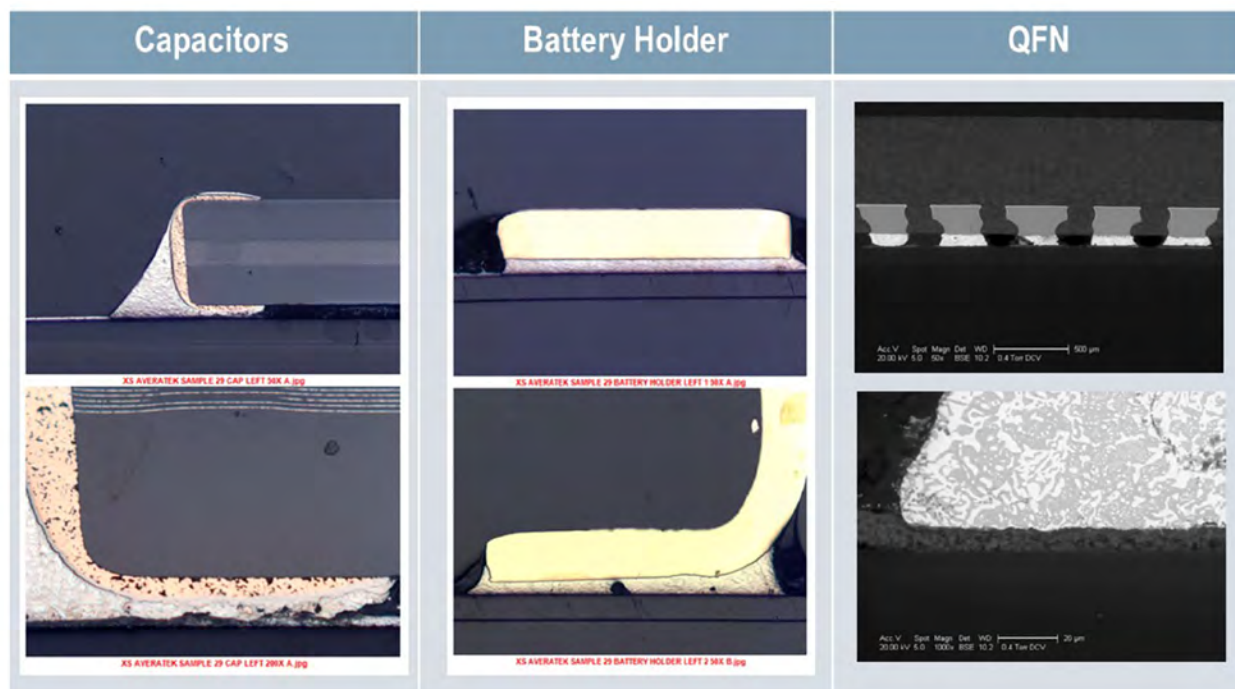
Cross-sections of capacitor, battery holder, and QFN/BTC soldered using surface treatment.
